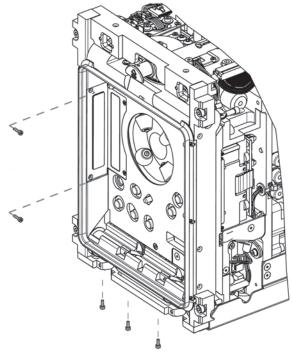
Fluidics Module Screws Securing Suction Chamber Glass and Bottom Cover to Faceplate
